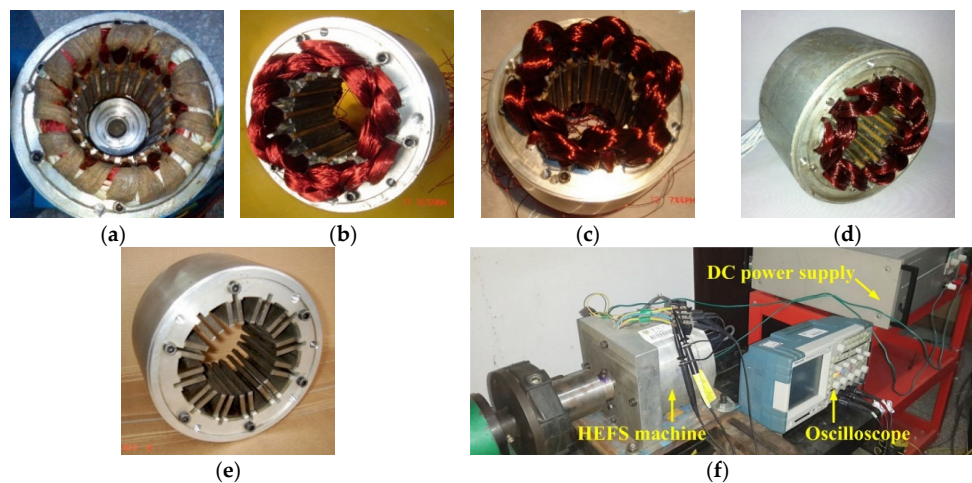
HEFS machine prototypes and experimental platform. (a) Stator of PM-top machine; (b) Stator of PM-bottom machine; (c) Stator of PM-middle-1 machine; (d) Stator of PM-middle-2 machine; (e) Stator iron and housing; (f) Experimental platform and instruments.
